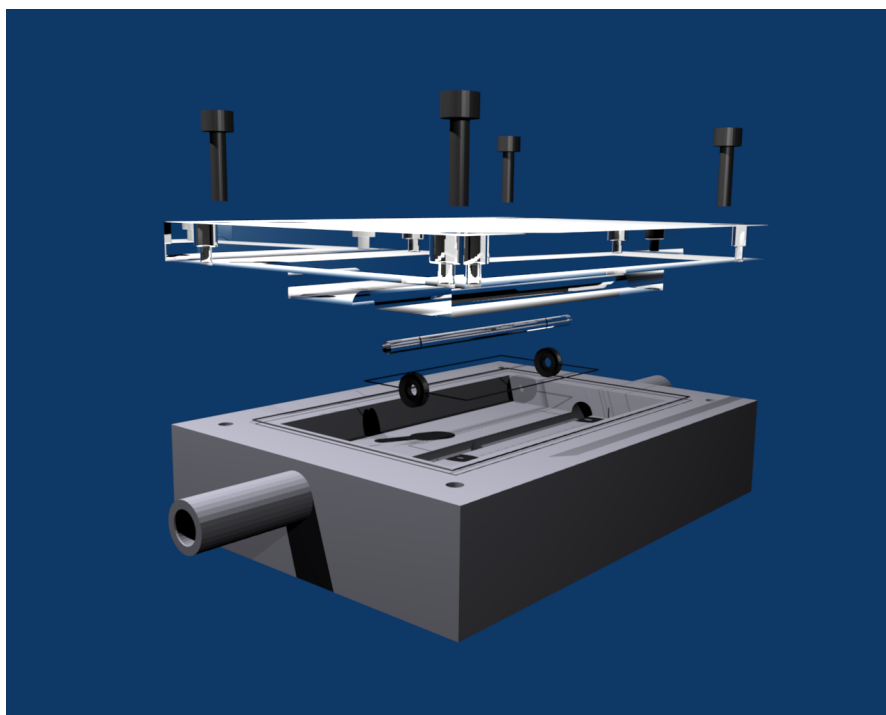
Exploded view taken from the design drawings for the capillary mounting block. In this view the shape and function of the block is a little easier to follow.
